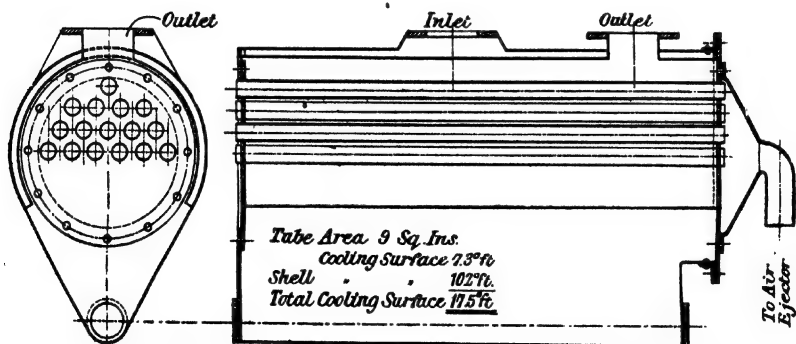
DUST SEPARATOR AND GAS COOLER FOR PARKER GAS PRODUCER.
